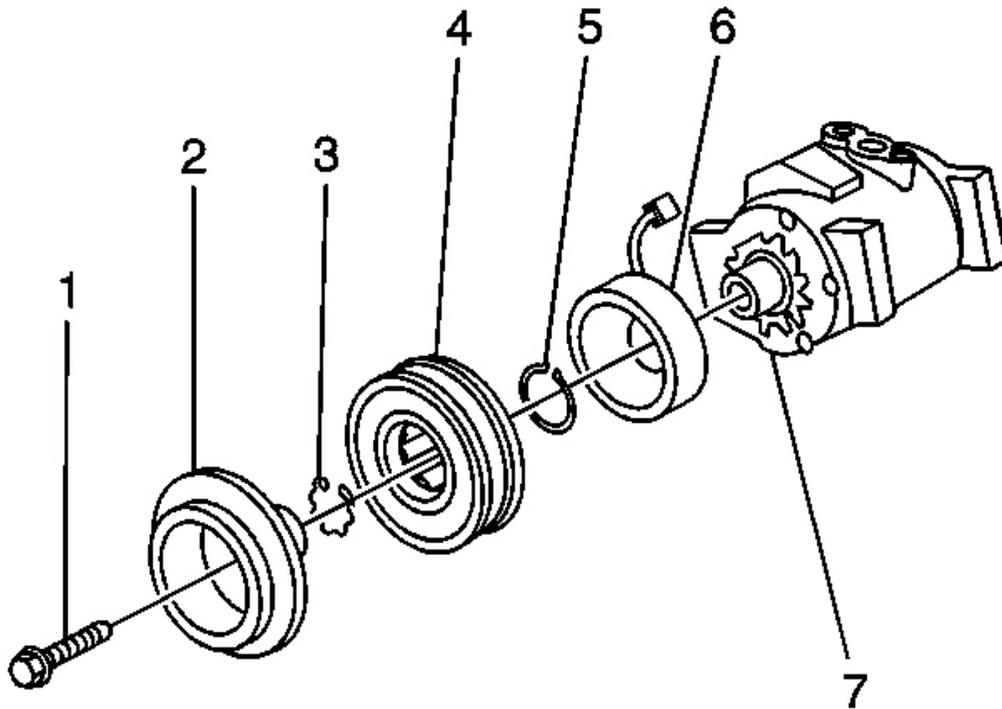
Exploded View Of Compressor Clutch Plate Assembly
